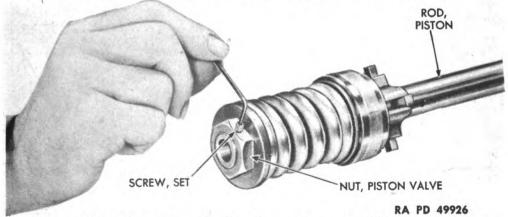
Removing the Set Screw from the Piston Valve Nut
